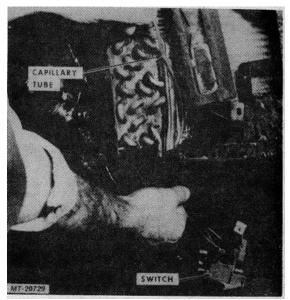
Withdrawing Thermostatic Control Switch Capillary Tube from Housing
